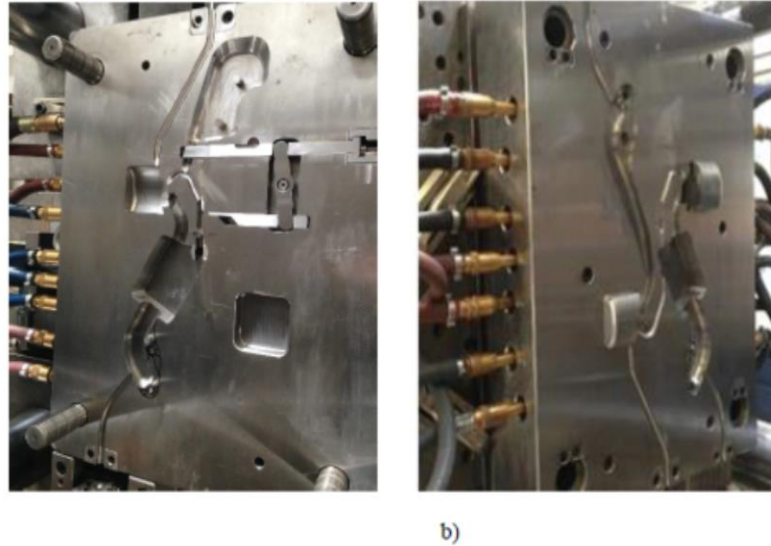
Final version of the mold to produce the clutch pedal: a) fixed part; b) mobile part.
